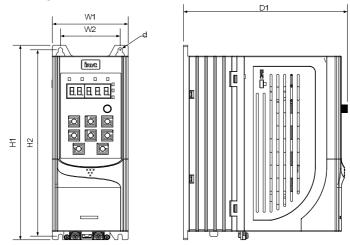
1.5–7.5kW VFD wall-mounting diagram
